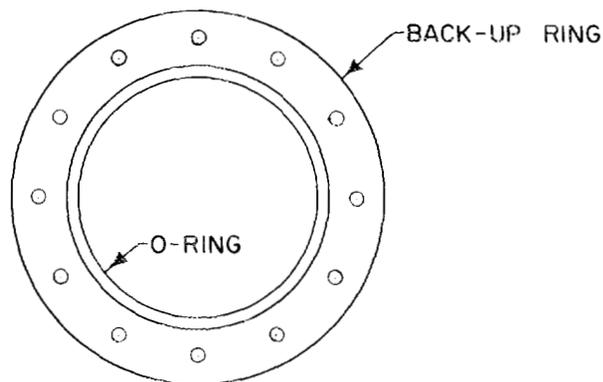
Hollow Metallic O-Ring With Back-Up Ring Used to Limit the Amount of Squeeze Experienced By the O-Ring. The Back-Up Ring Provides Mechanical Support, and When the O-Ring is Compressed, It Flows Outward Against the Inside Diameter of the Back-Up Ring.
